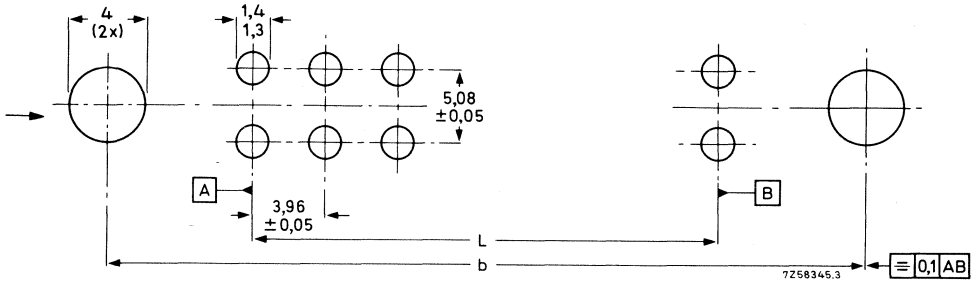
Piercing diagram for double row connectors with pins for dip soldering. See Table 2 for dimensions b and L.
